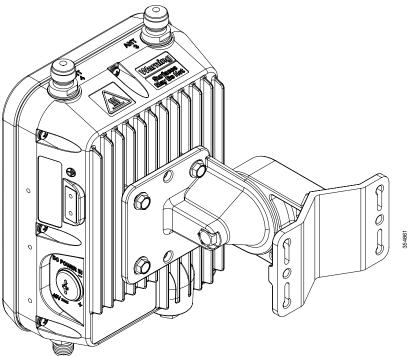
Exploded View of the Pivoting Mounting Kit
